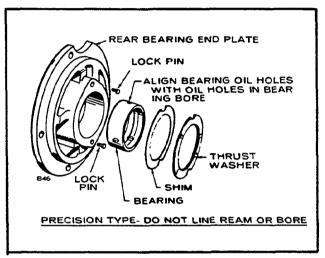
BEARINGS FOR REAR BEARING PLATE
